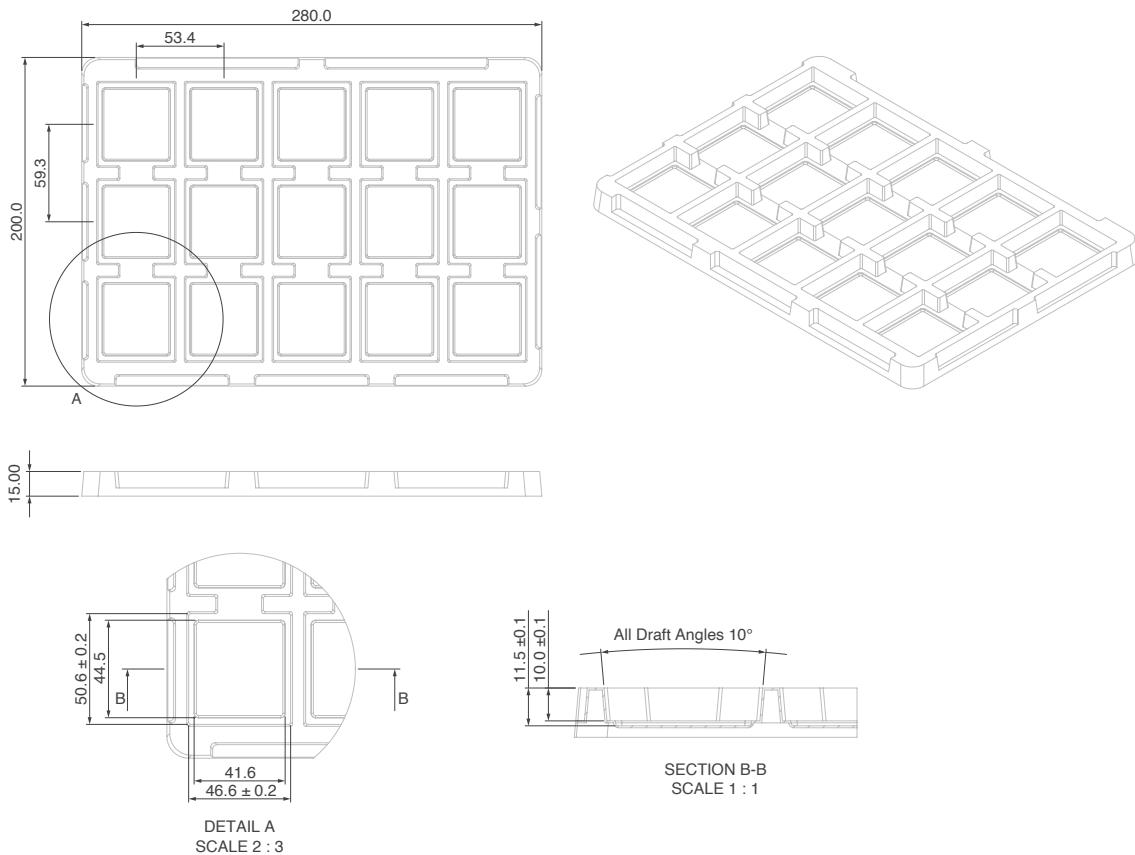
STANDARD PACKAGING BOX DIMENSIONS
